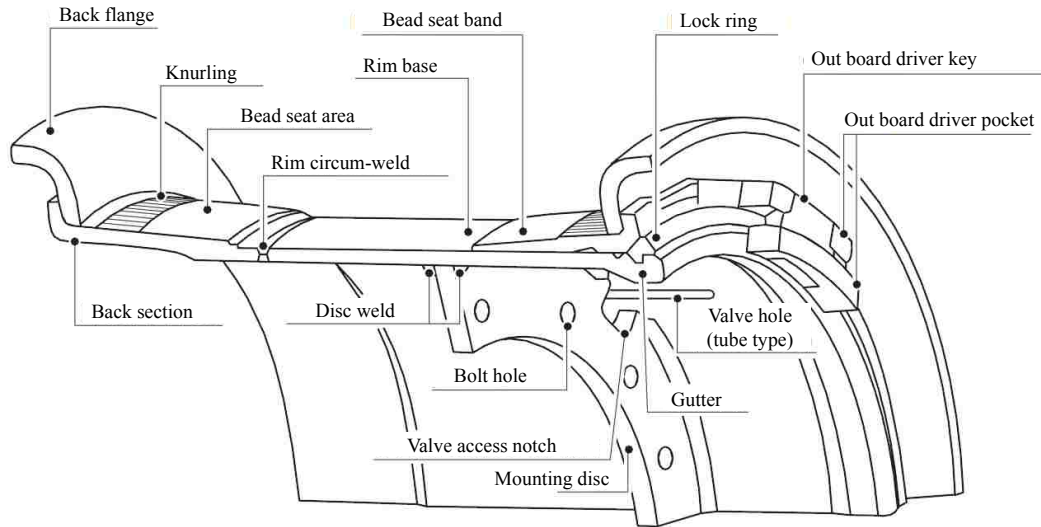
Names of the components of a five-piece wheel involving an out board driver [18].
